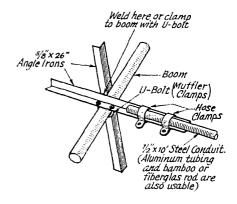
Drawing showing how the angle-iron legs of a quad spider are attached to the boom. One angle iron can be clamped to the boom with a U bolt, and the other angle iron welded to the first angle iron, or both angle irons can be clamped to the boom with separate U bolts.
